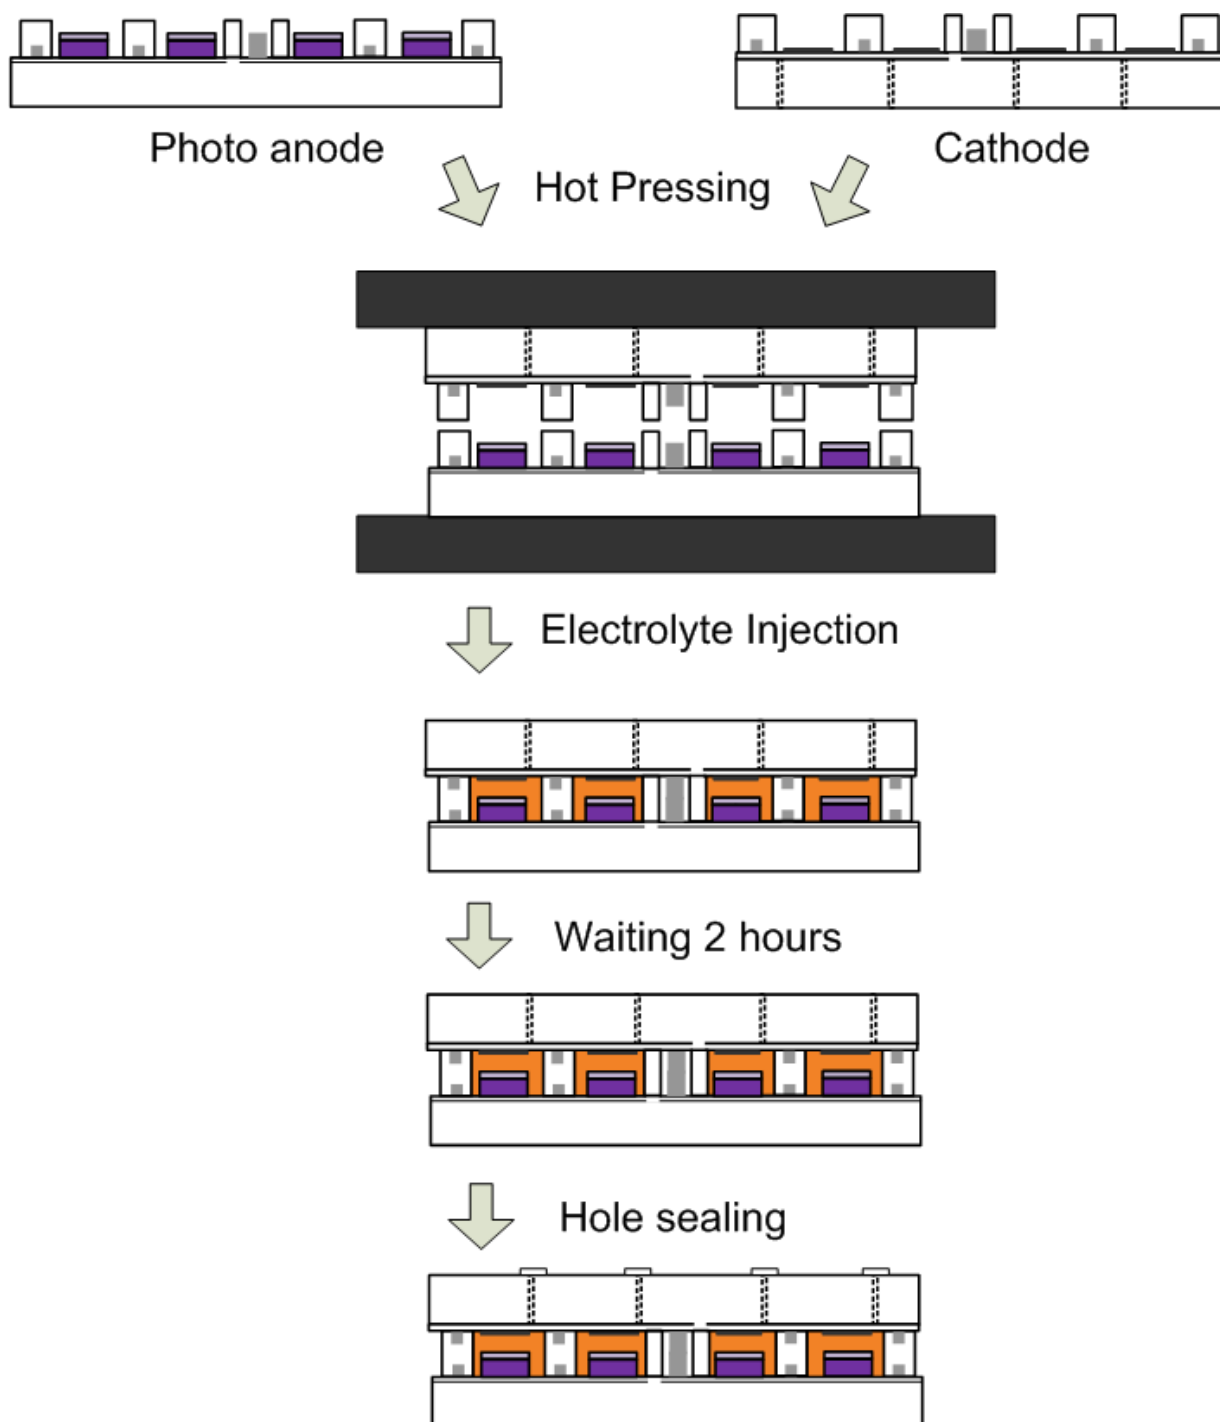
Schematic drawing of the assembly process for an interconnected grid-type DSSC module
